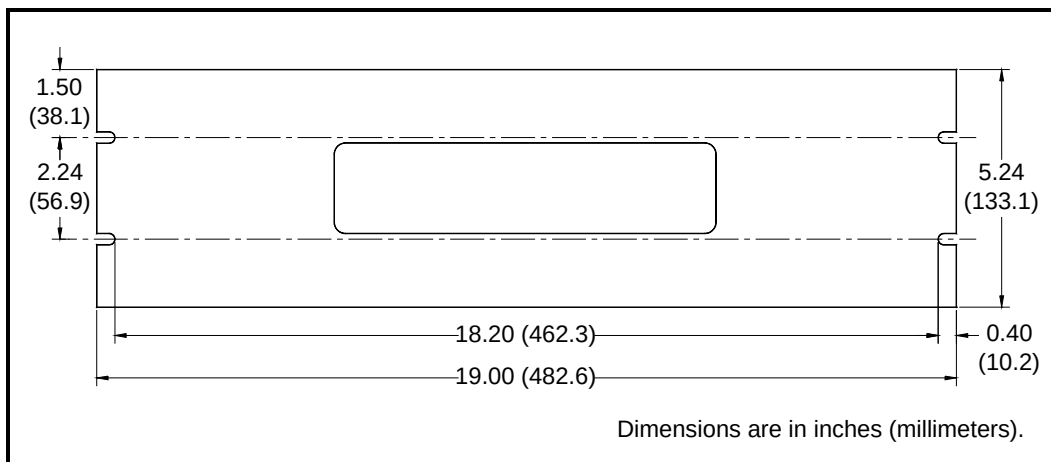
M4 Rack-Mount Adapter Dimensions
